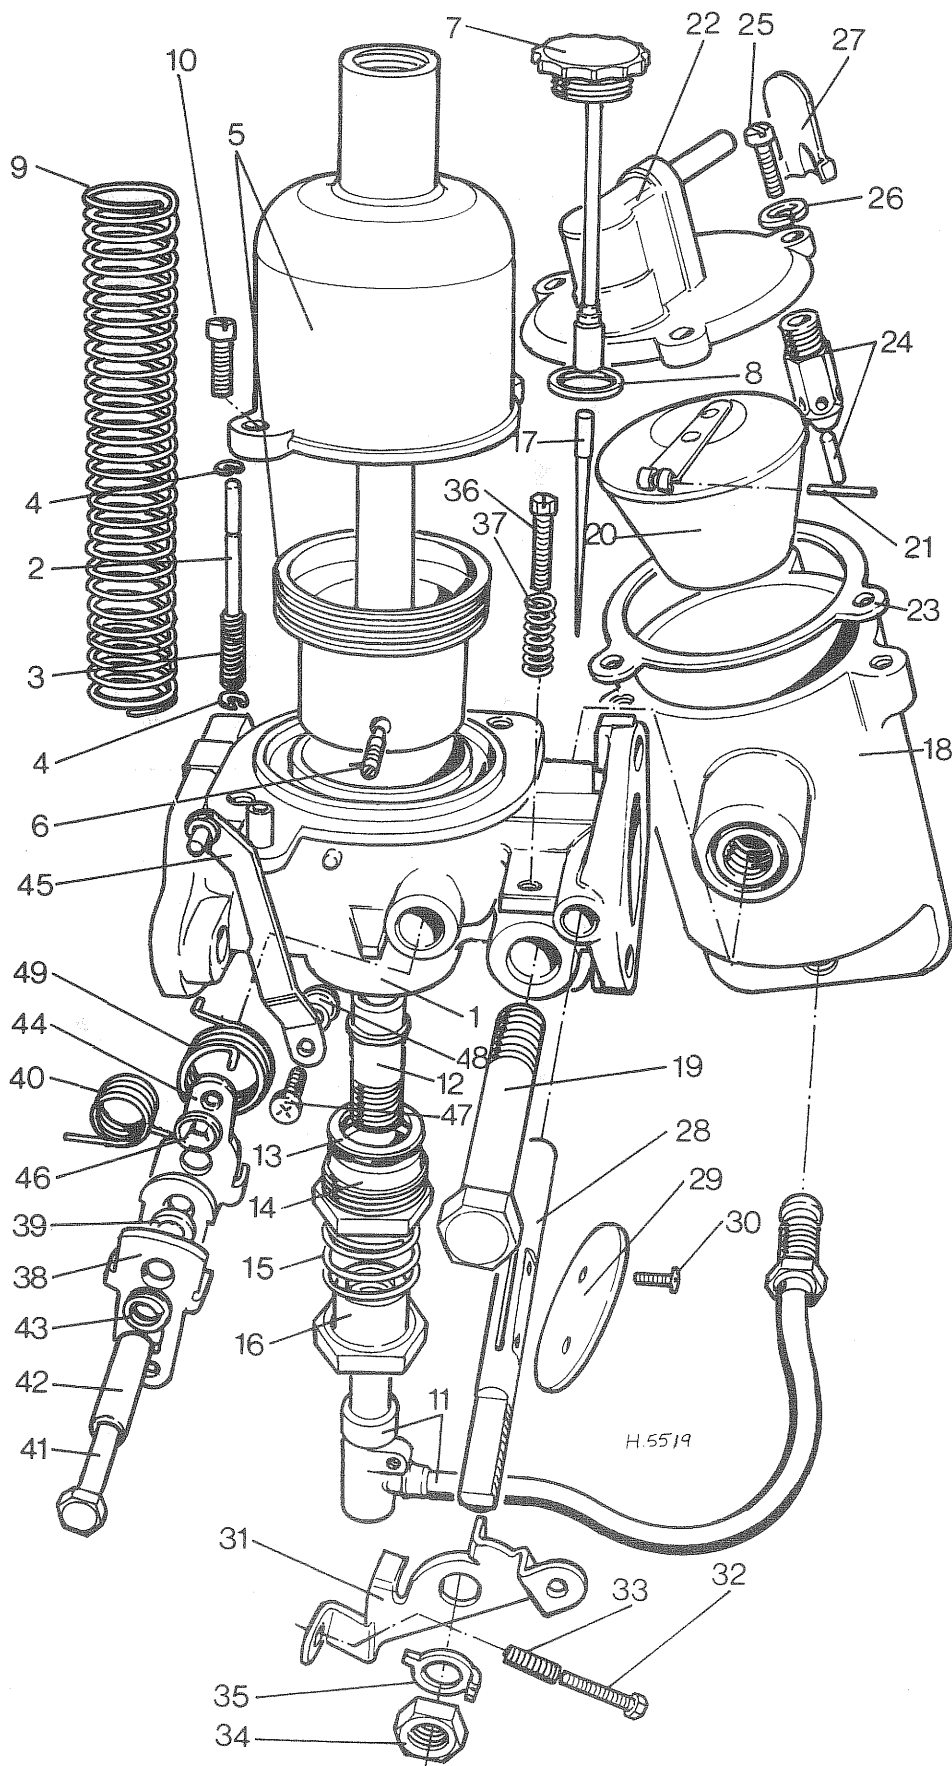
Exploded view of the SU HS2 carburettor fitted to early manual transmission models (Sec 15)
